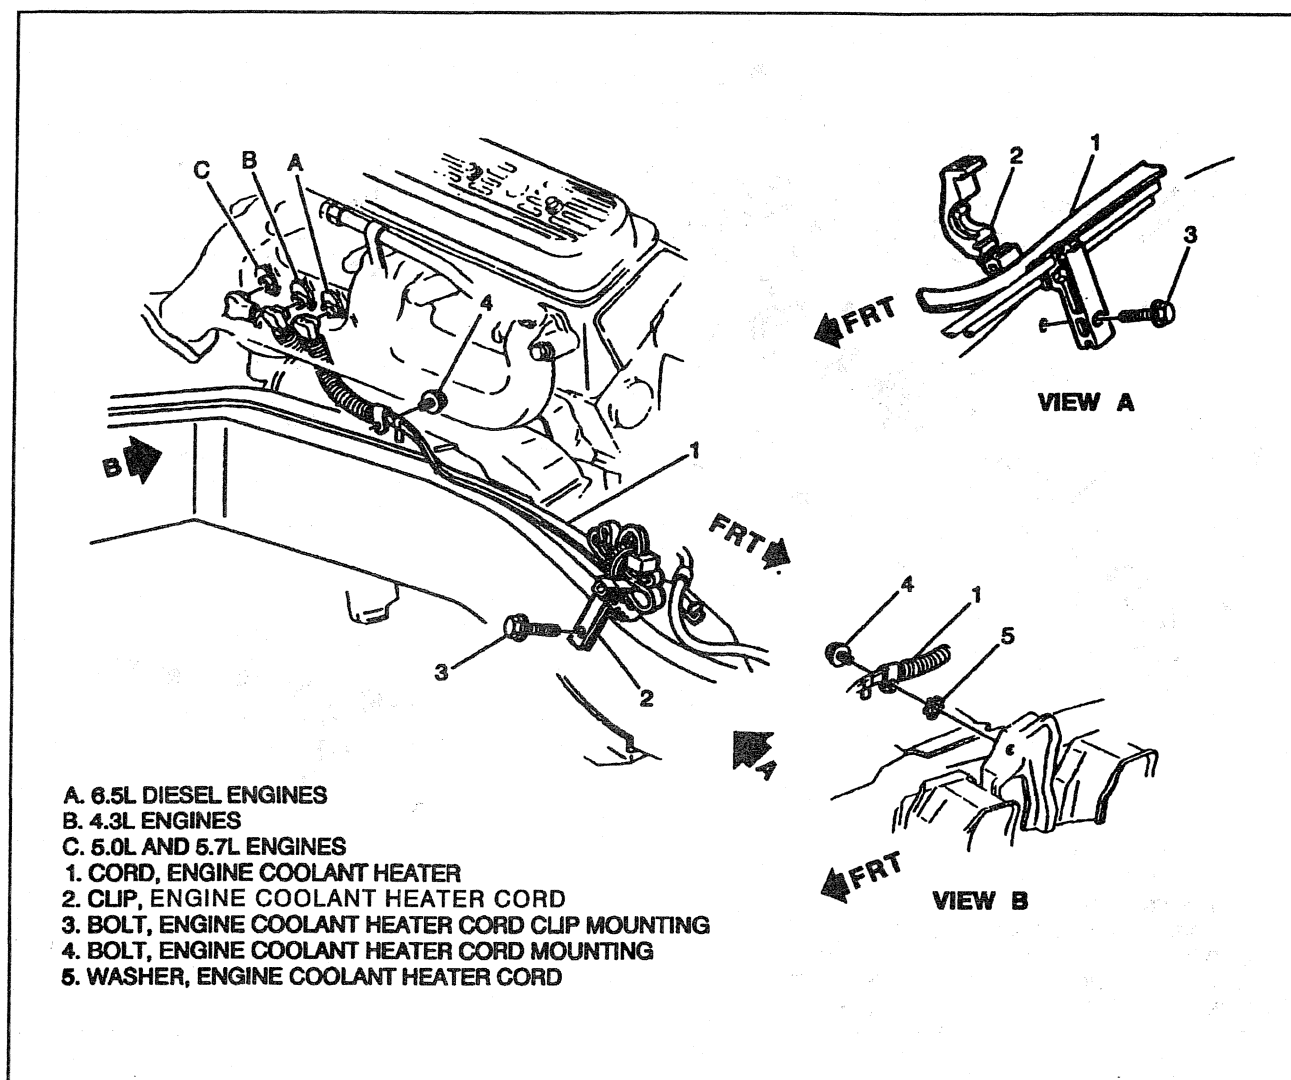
Engine Coolant Heater Cord Routing (Four-Wheel Drive Models)
